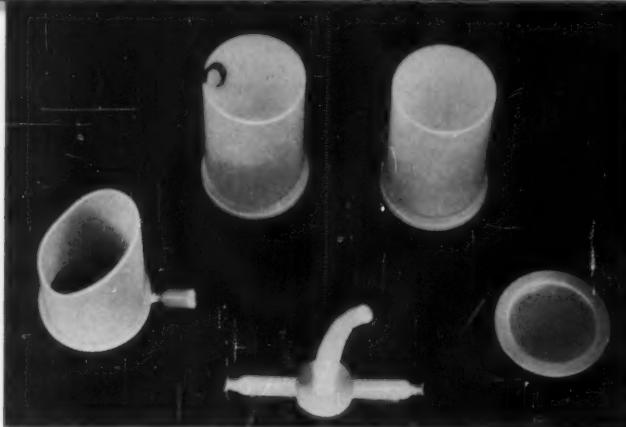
Pieces made in mold illustrated in Fig. 1. At lower left is a short shot that shows general pattern of filling. At top left is a container made in the unexhausted mold. It failed to fill completely and compression of the air ahead of the melt burned the edge as it reached the top. Top right and lower right are perfect pieces made in vacuum-vented mold. Bottom center is sprue and runners with 0.085-in. wide edges
